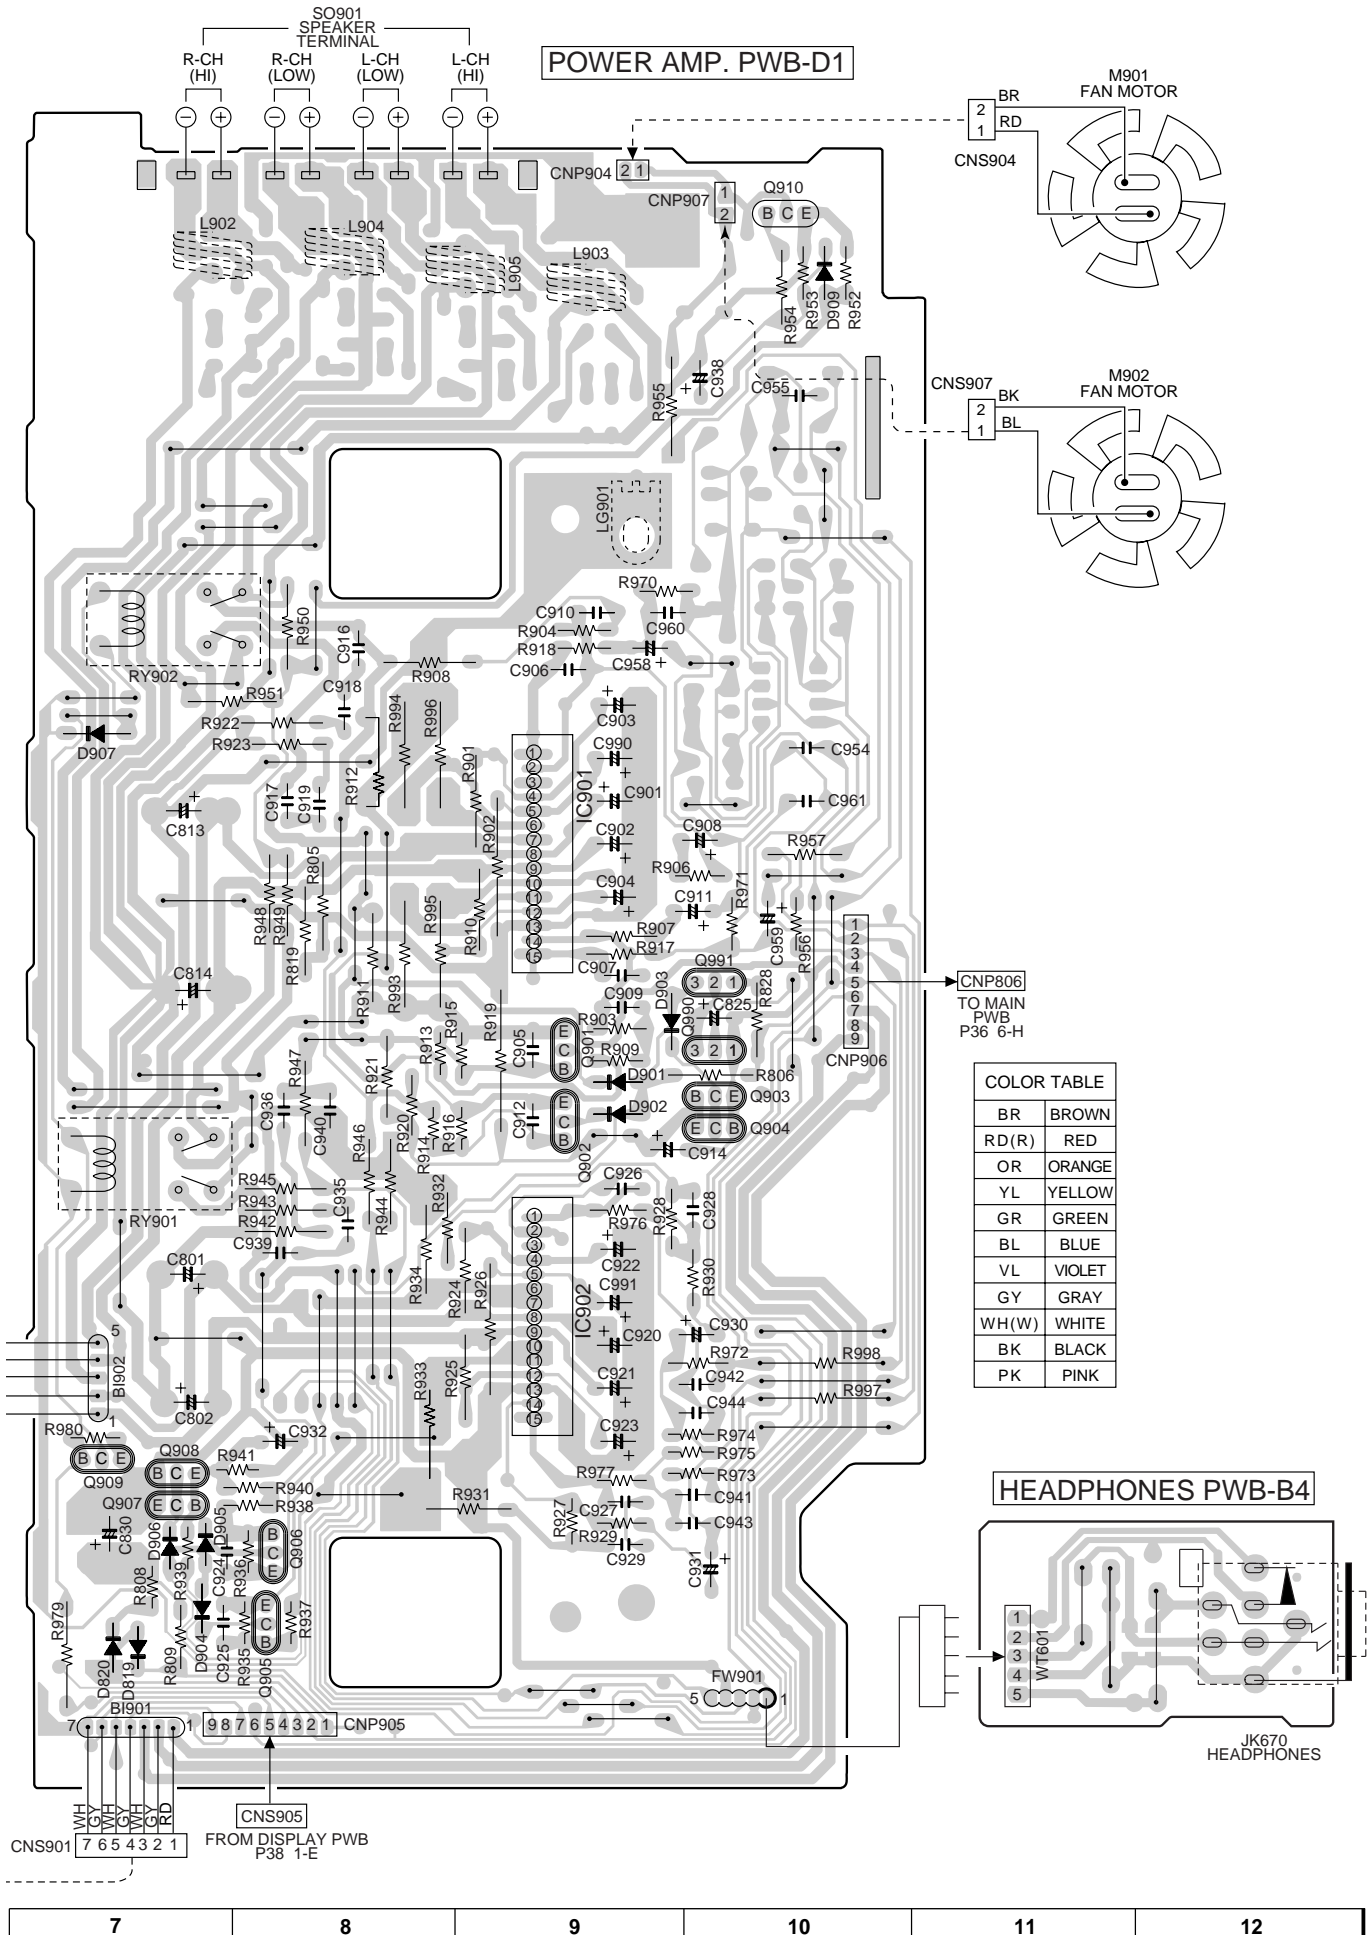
WIRING SIDE OF P.W.BOARD (6/9)
